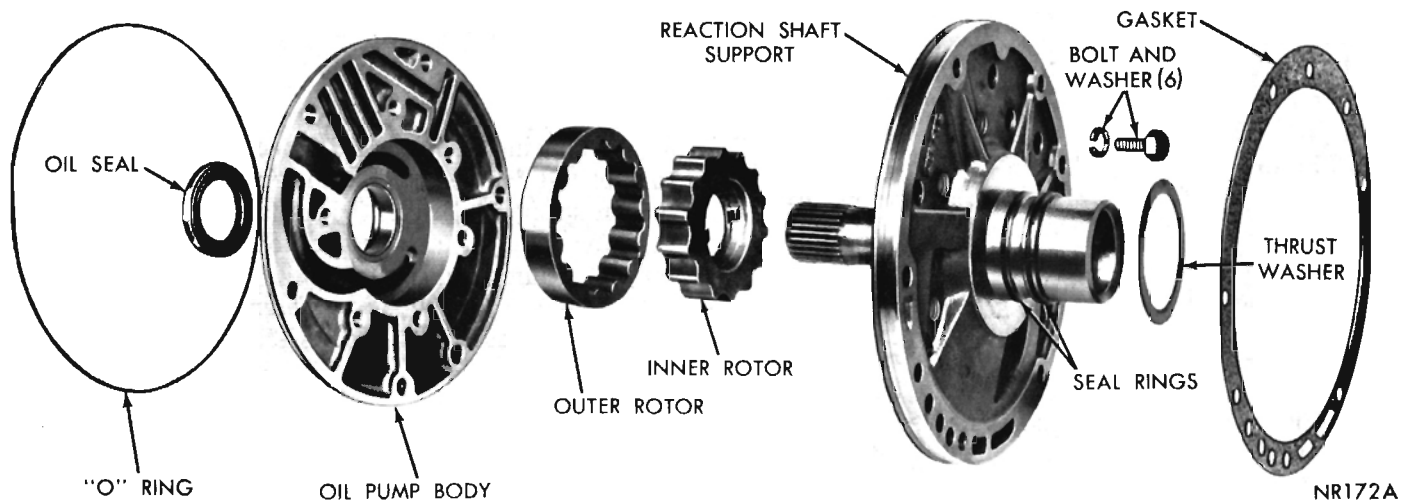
Oil Pump and Reaction Shaft Support Disassembled (A-904)
